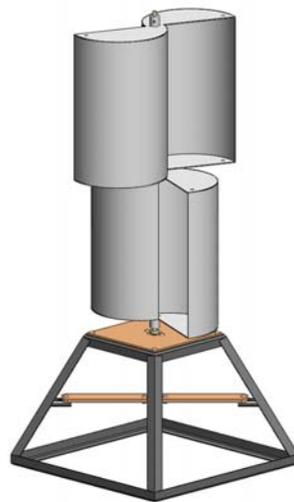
3D CAD drawing of the Savonius rotor and support system
